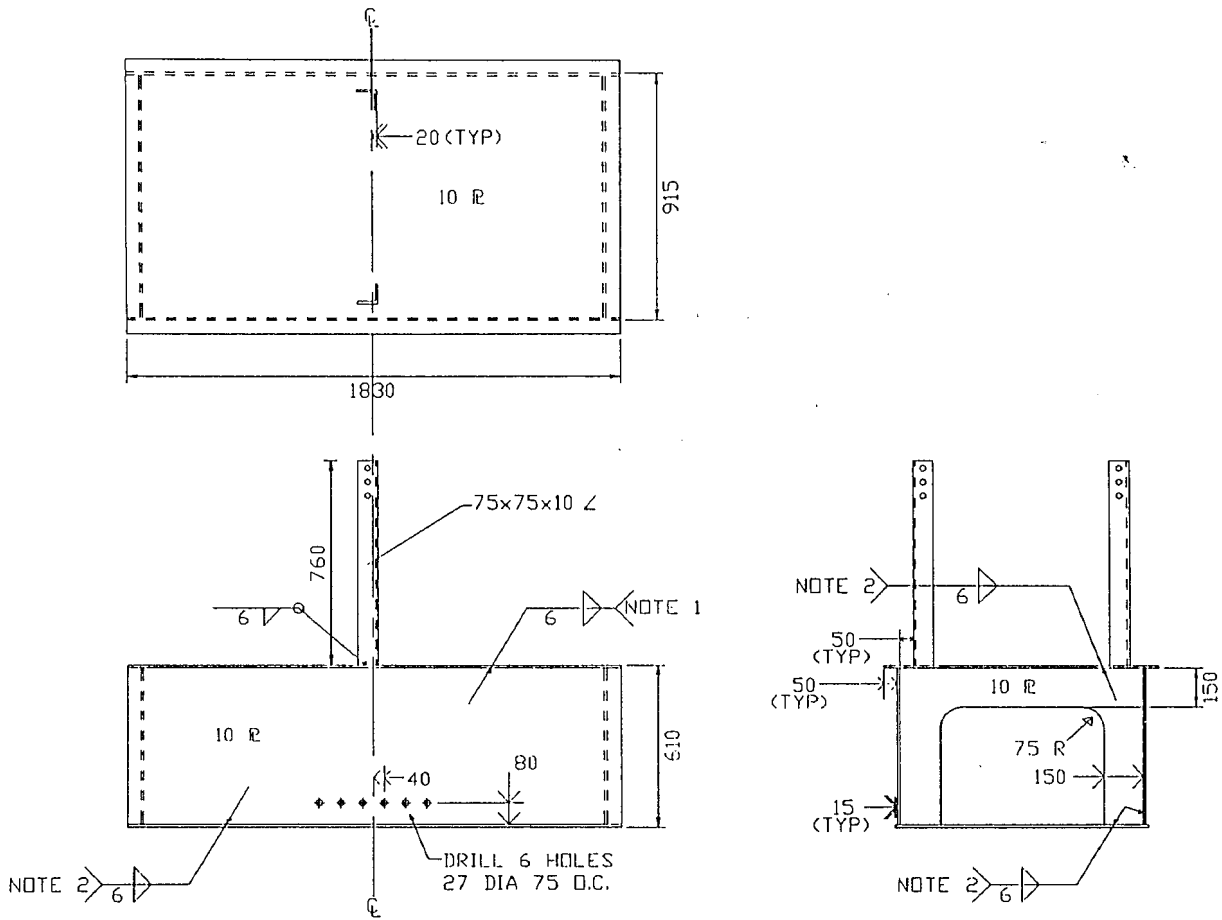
Primary detail Axial and Bending Specimen detail drawings
